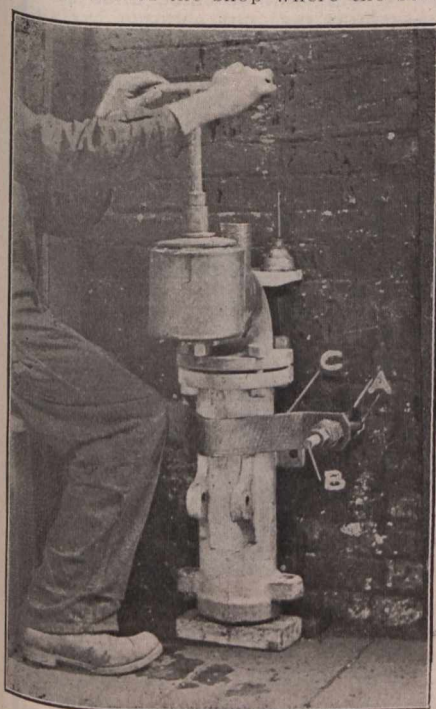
Throttle Valve Stand Clamp used in Valve Grinding.
